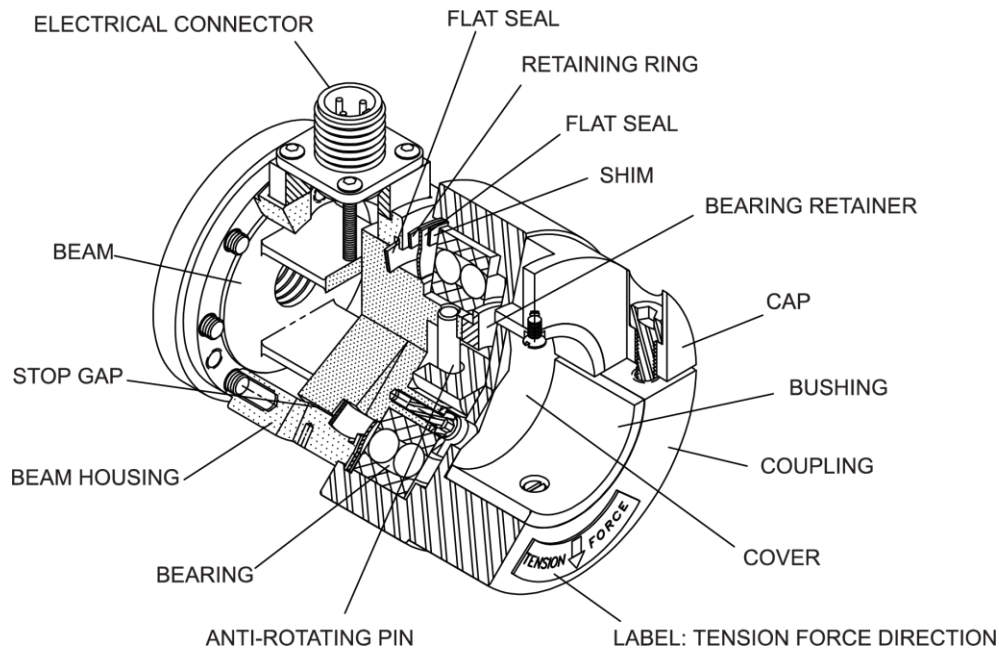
DEAD SHAFT VERSION CUT-AWAY VIEW
